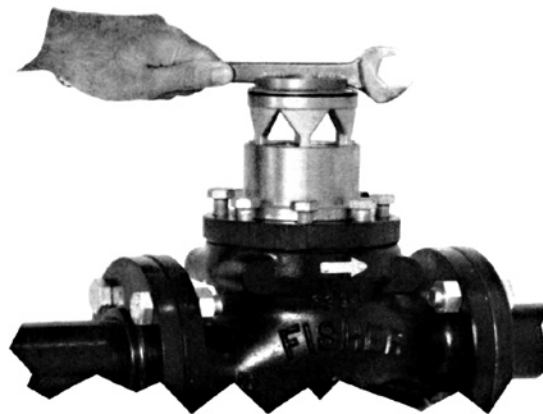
Seat Ring/Cage Removal or Installation Using Body as Holding Fixture
